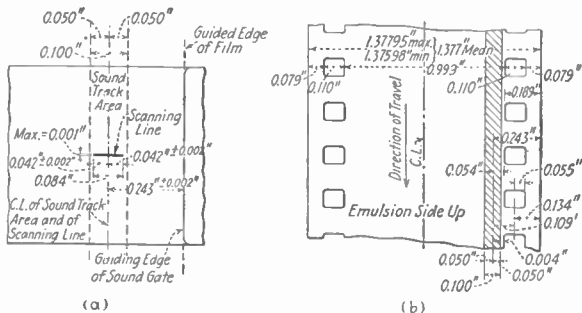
(a) Position and dimensions of scanning line; (b) standard dimensions of sound track on 35-mm. film.
